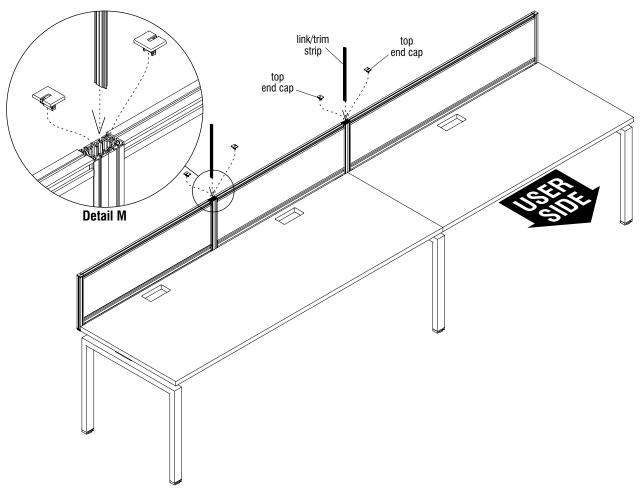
Single-Sided Fixed Benching, Privacy Screen Installation
